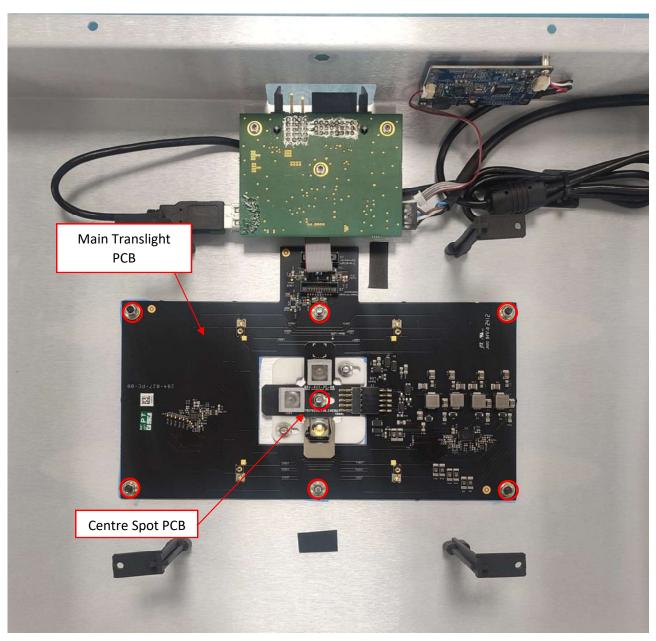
View of Trans-Light PCB when removed from document tray (7x retaining Nuts)
